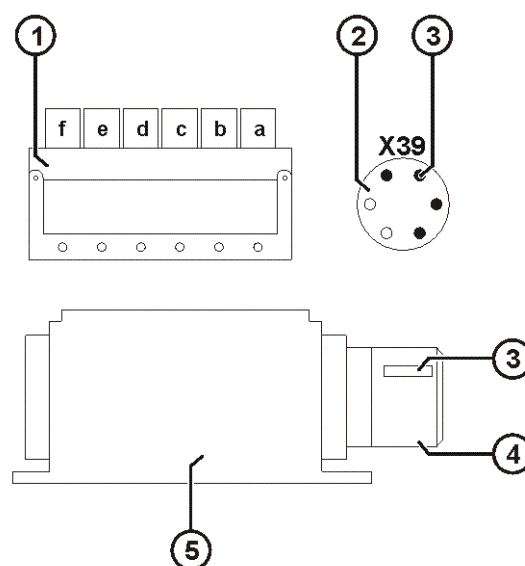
Connection of the position switch cables to the surface-mounted housing
